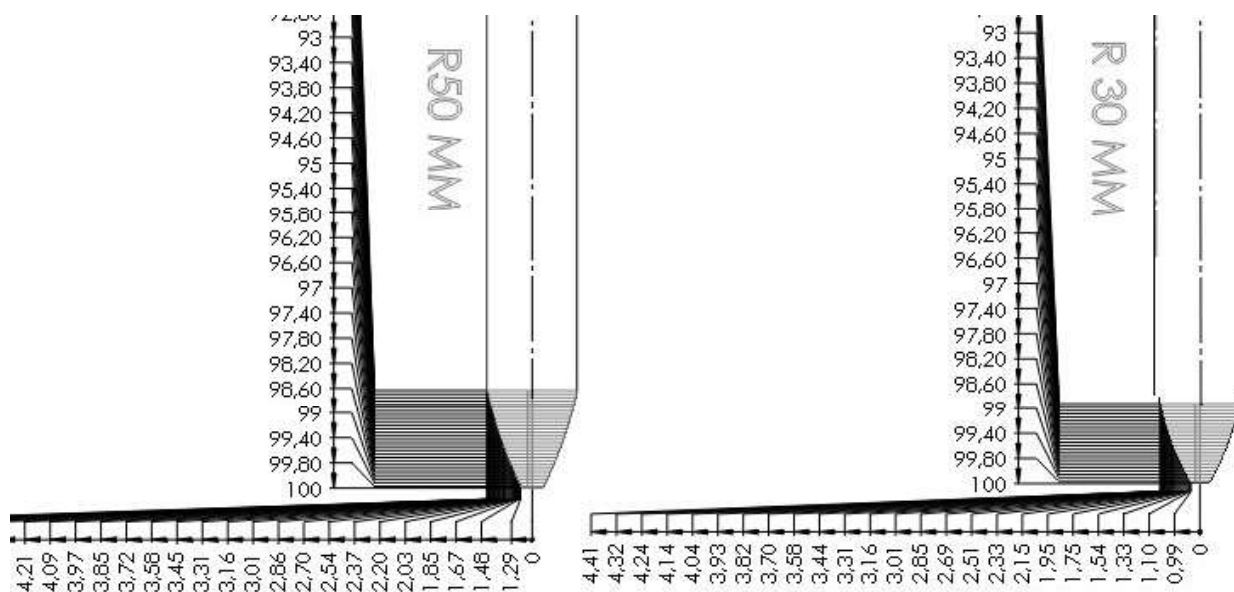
The drawing of grinding wheel outline with marked dimensions
